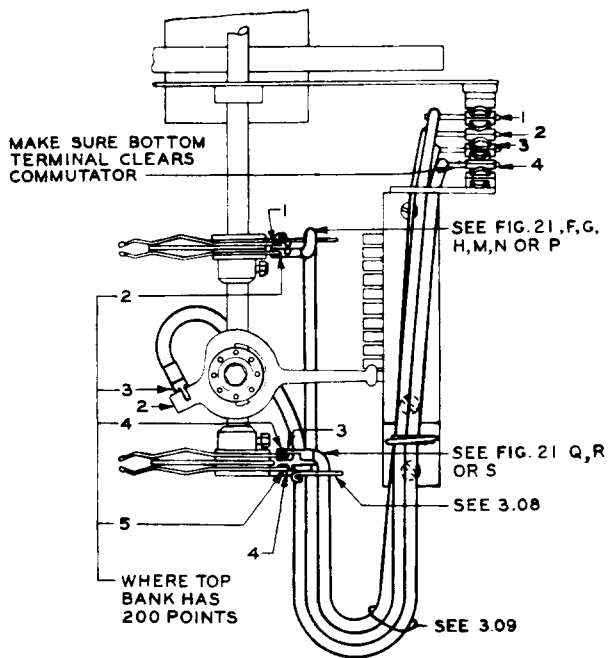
Method of Dressing and Connecting Wiper Cords at Test Jack Assembly
